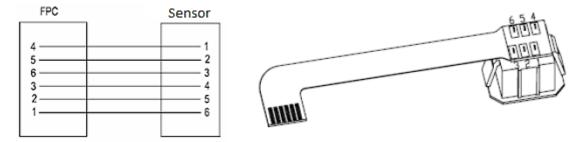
SMARTsat® sensor basic flex cable with pin connector drawing (REF: 9020522001)
